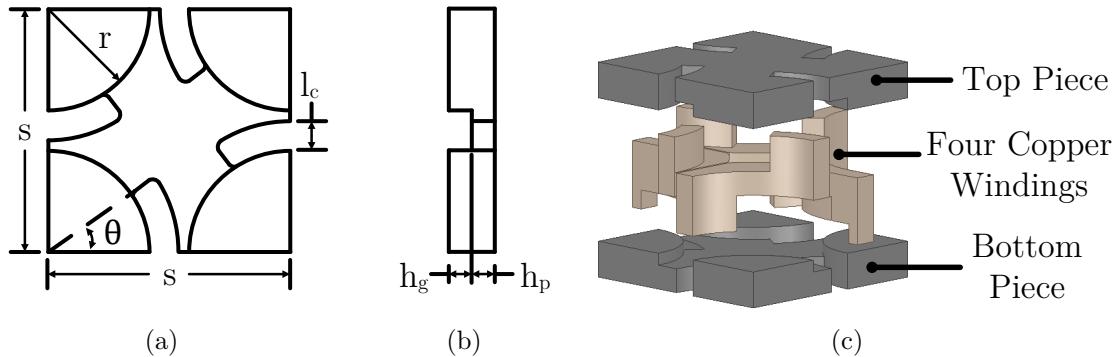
(a) Top view and (b) side view of the vertical coupled inductor structure highlighting the geometric parameters used for optimization. (c) Vertical coupled inductor two-piece assembly, illustrating the copper winding positioning between the top and bottom magnetic core pieces.
